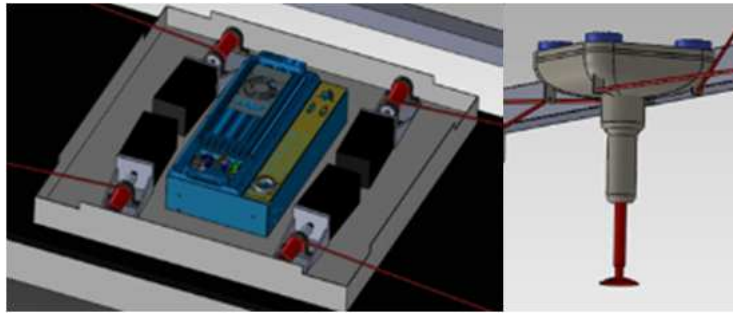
Detailed of preliminary design for cables driven and mobile platform
